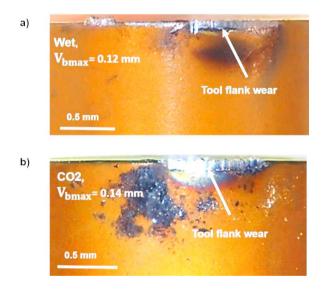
SEM observations of the tool flank wear states after 15 min of machining under: a) wet; b) CO2 cooling strategies.
